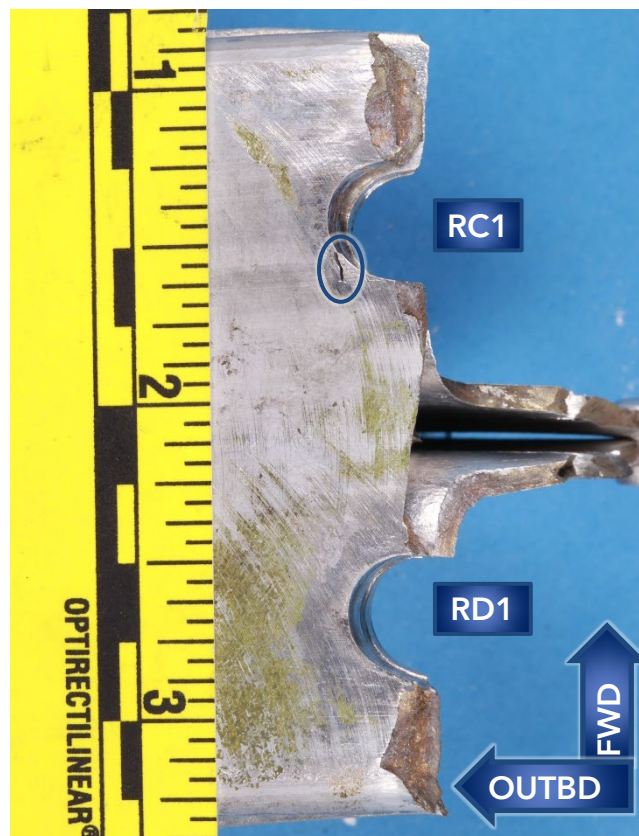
Cleaned right wing main spar lower surface adjacent to the fracture surface. A small partially opened crack intersecting hole RC1 is circled.
